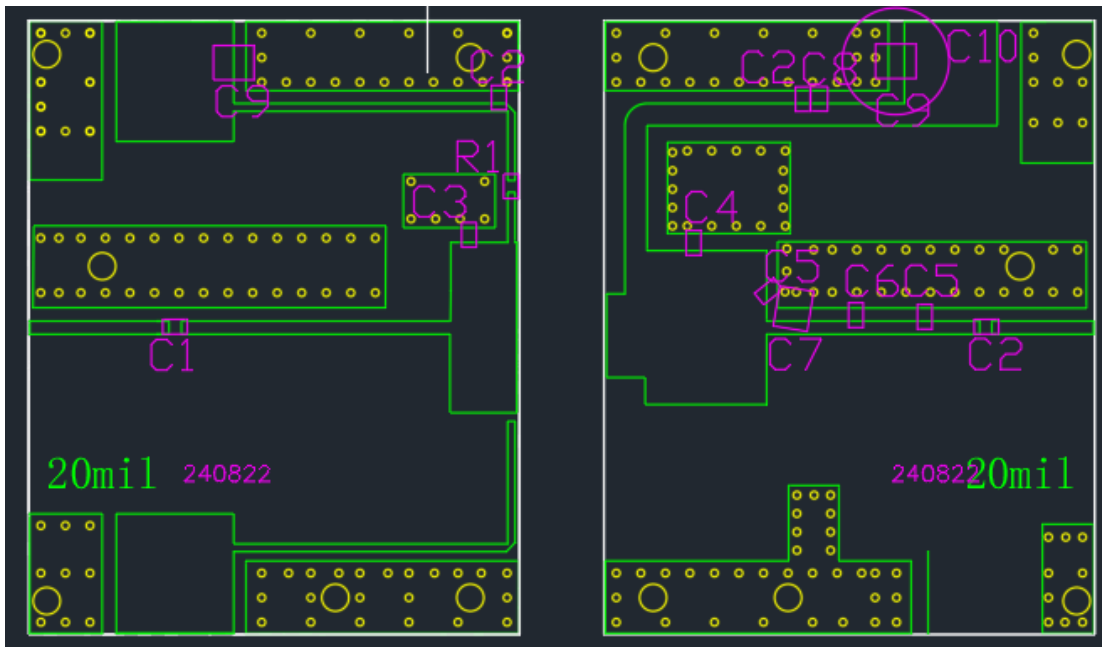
Test Circuit Component Layout, 20mils RO4350B
